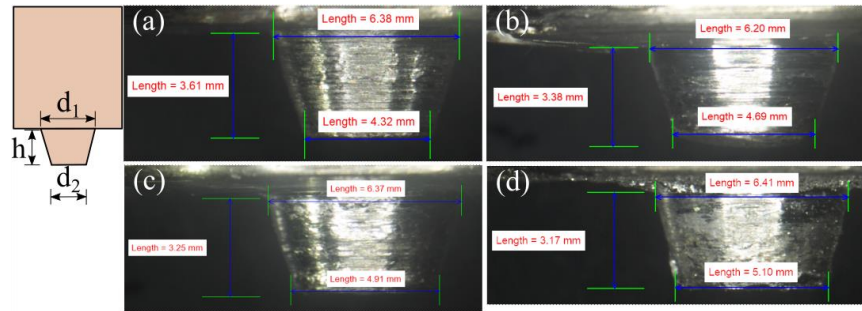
Progressive variation in the tool pin geometry when welding at 900 rpm and traverse speed of (a) initial tool under no weld condition, (b) 30 mm/min, (c) 60 mm/min, and (d) 90 mm/min
